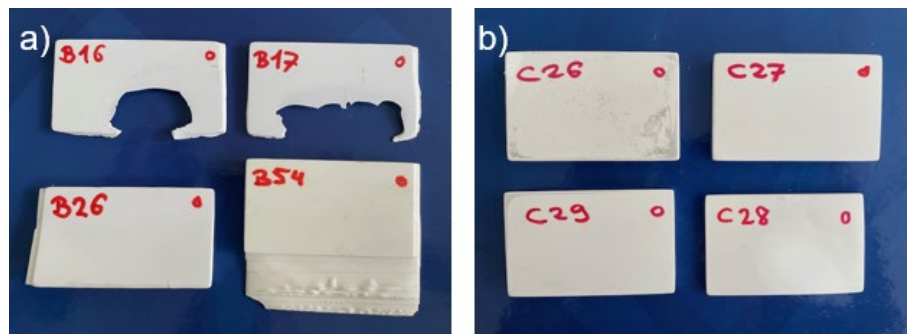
Specimens with high amount of Aluminum oxide 3D-printed with a) standard 3D-printing device and b) advanced 3D-printing device.
